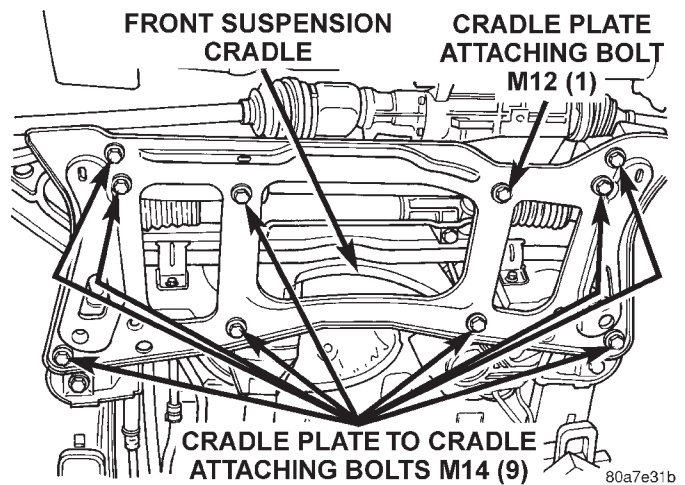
Front Suspension Cradle Plate And Mounting Bolts
